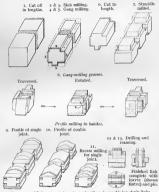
Wicks rotary typecaster; operations in machining chain-links. Scale : half size.
